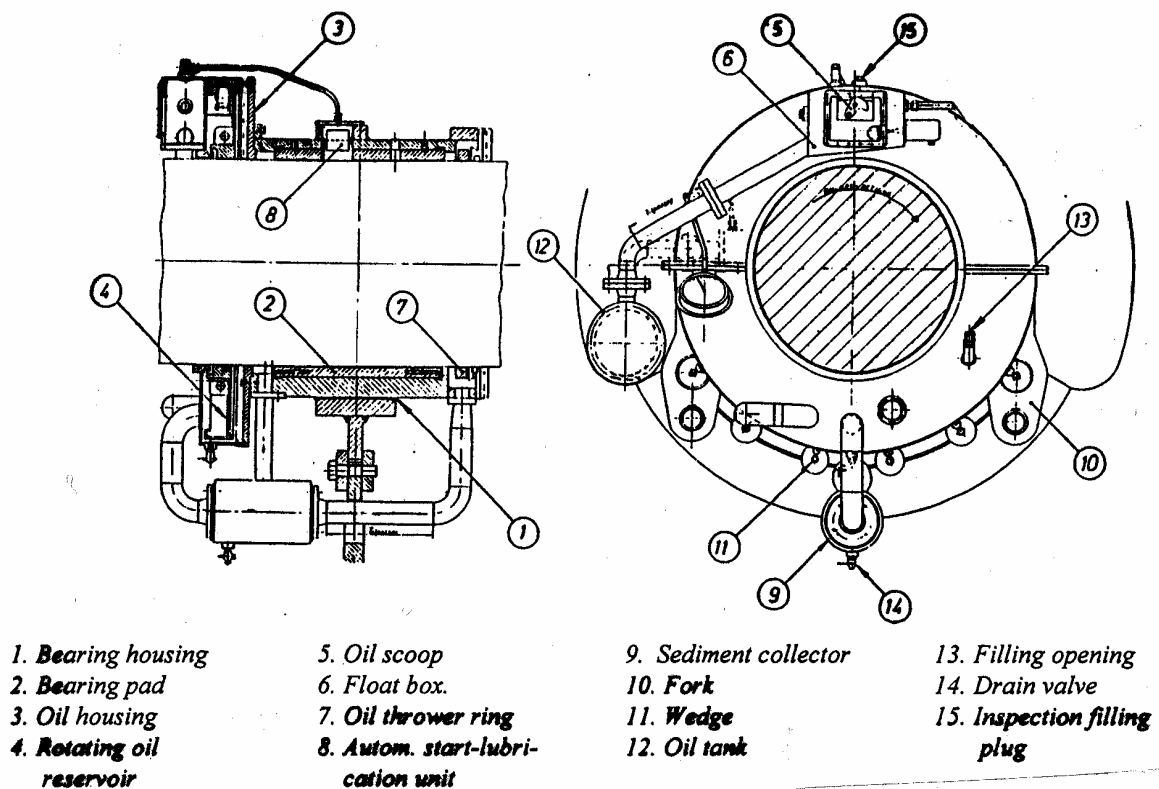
Turbine bearing (Courtesy of Kvaerner Brug)
